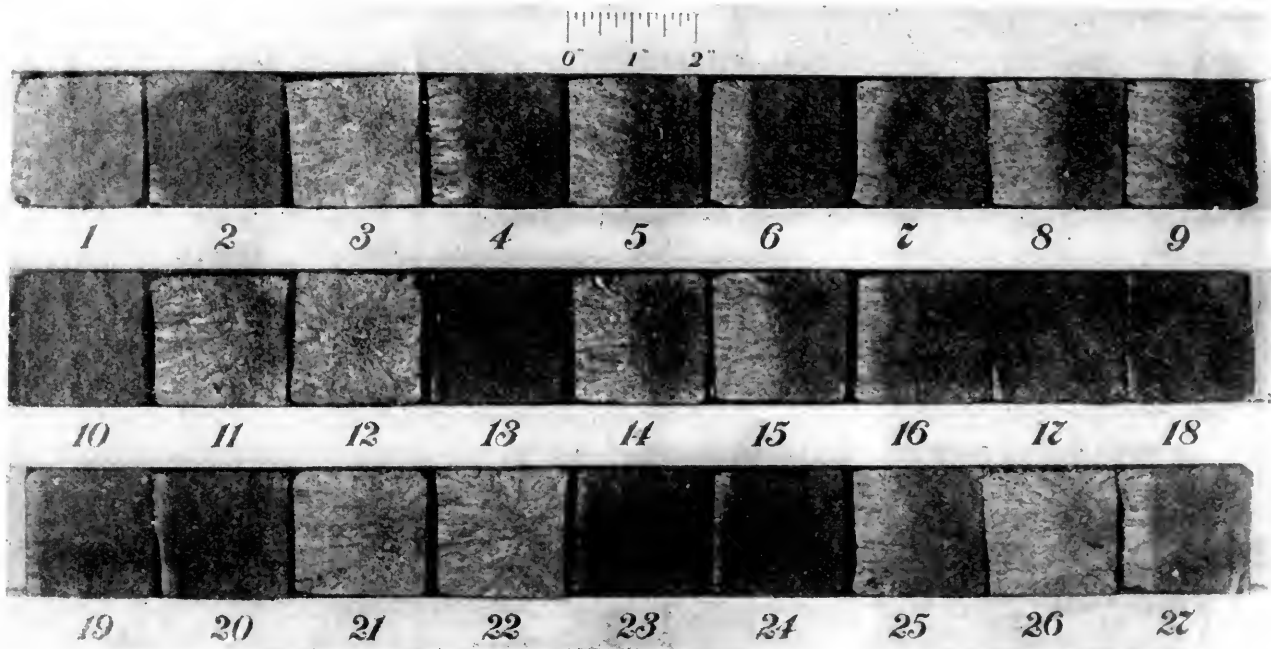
Showing Appearance of Fractures of Chilled Test Bars.
